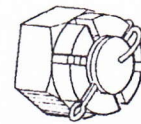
21 Proper Installation of a Cotter Pin. (1) Head of cotter is inserted firmly in slot. (2) Long end of cotter is bent back to centre of bolt, other end bent down flat. (3) Cotter is tight in nut.
